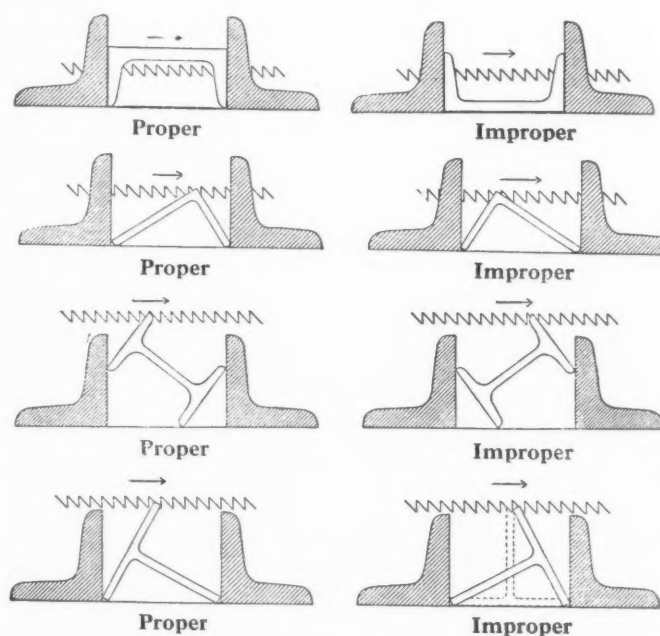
Proper and Improper Methods of Holding Various Shapes While Being Cut With a Hack Saw
